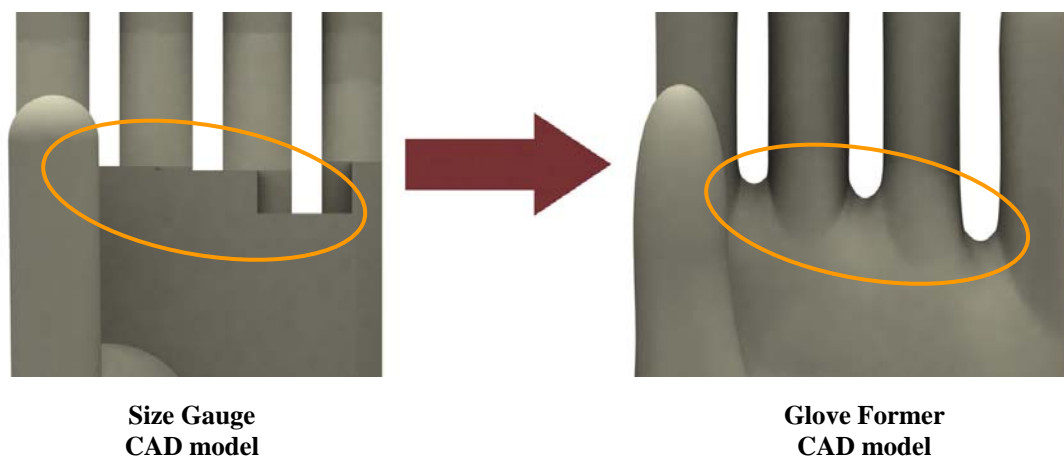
Differences in finger crotch detail between the size gauge CAD model and glove former CAD model.
